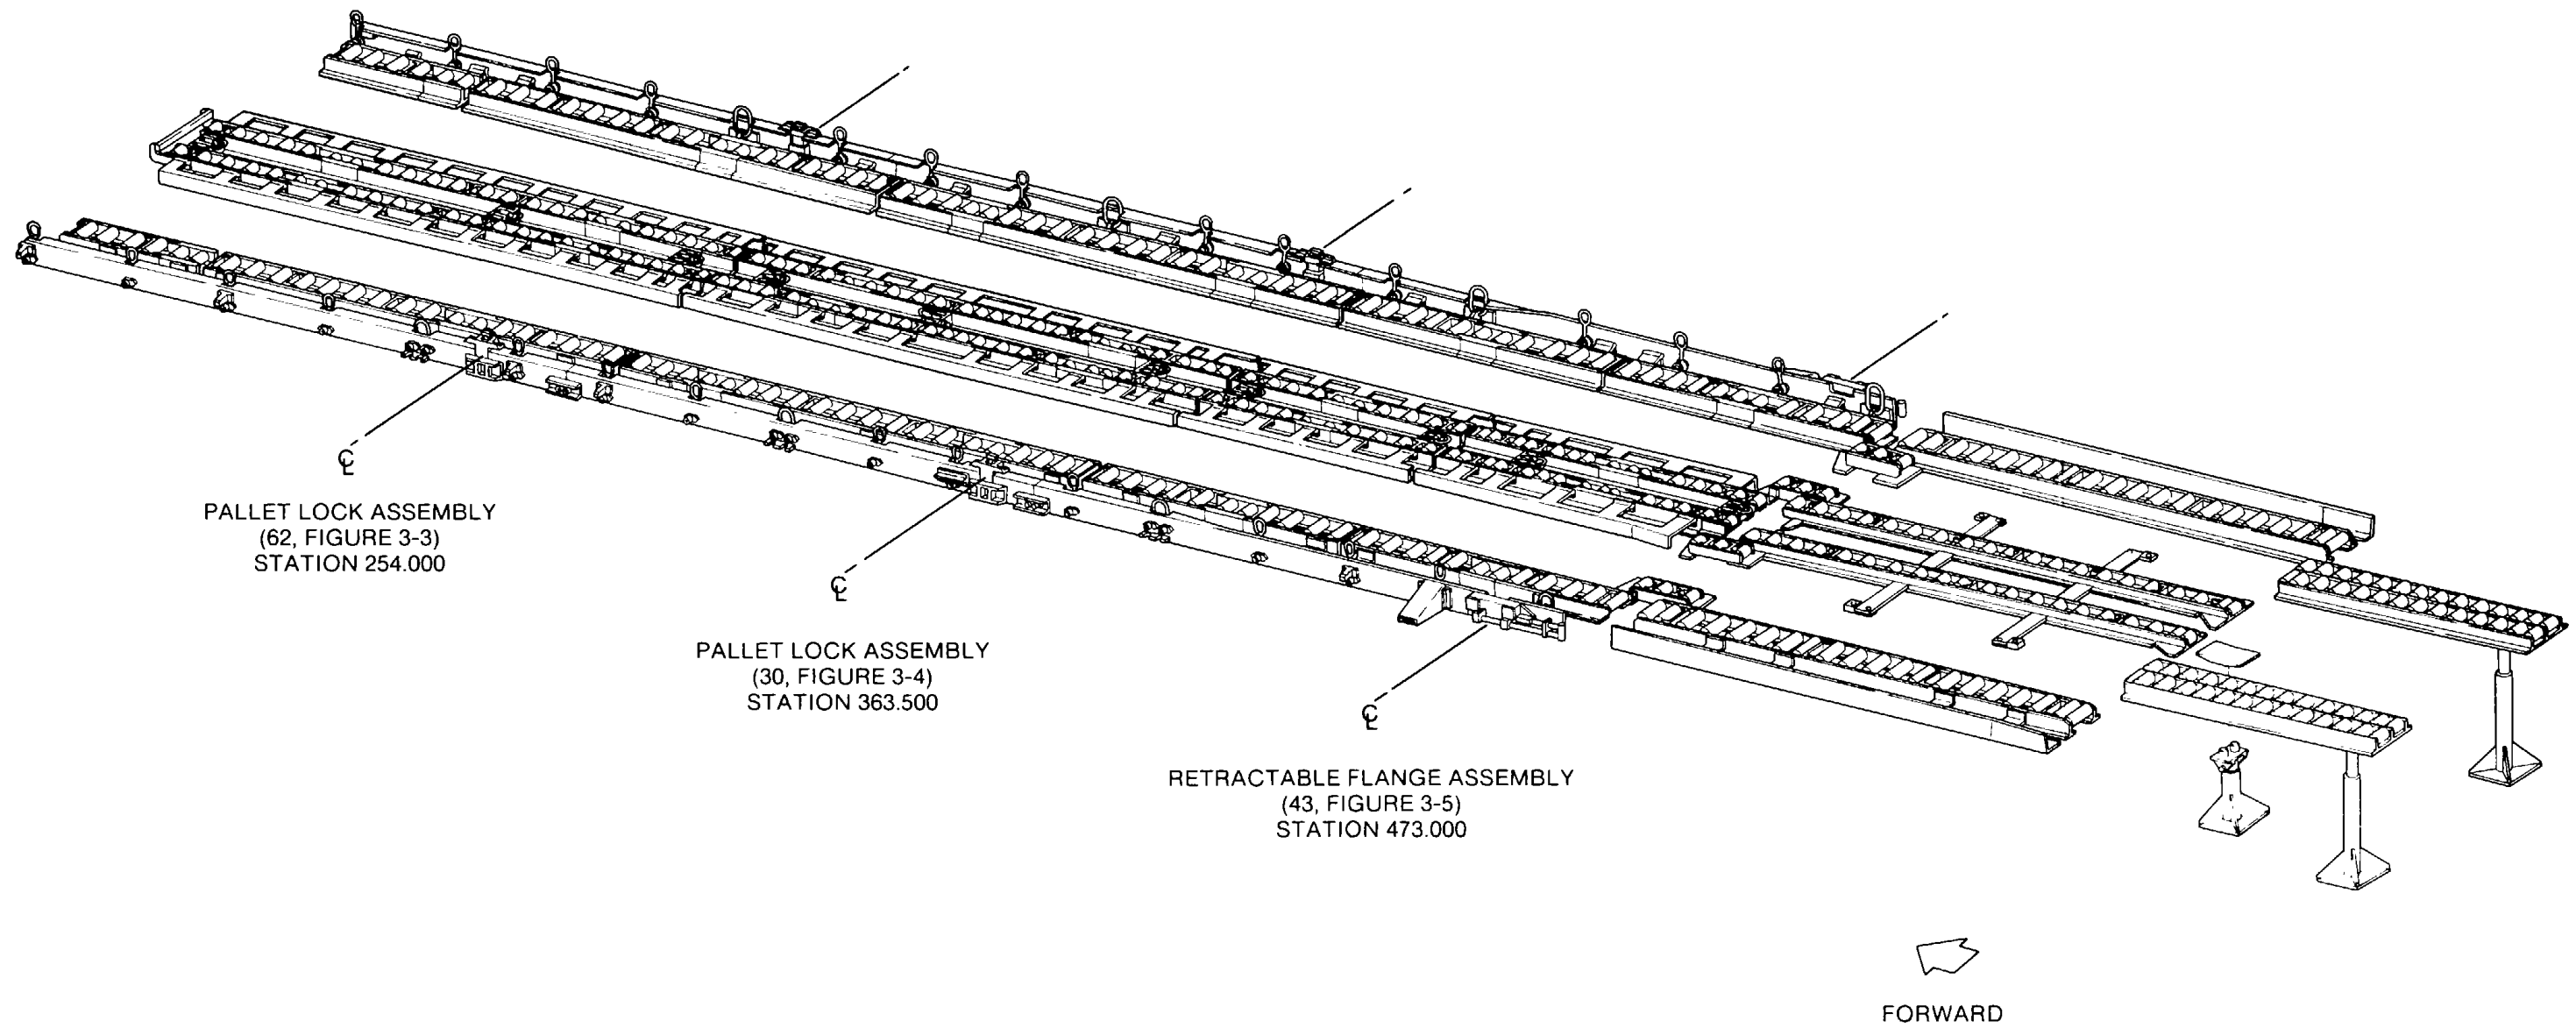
Location of Pallet Lock and Retractable Flange Assemblies
